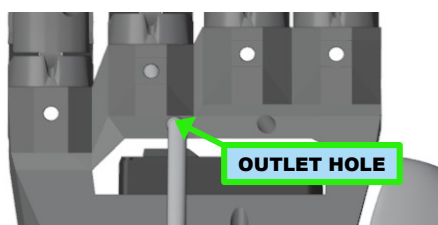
Inserting the tube into the tendon outlet hole (rear view)
